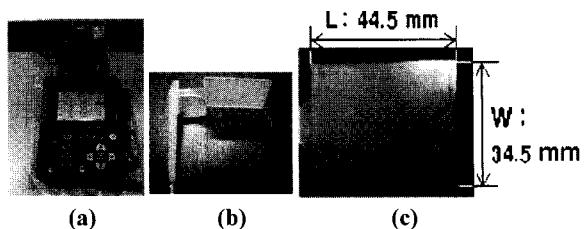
(a) Power consumption measuring device (KEW6310), (b) injection molded part, (c) the dimension of molded part
